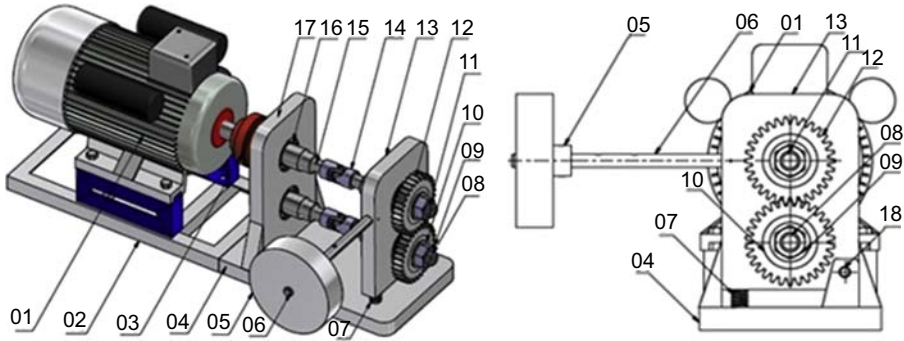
Schematic view of the experimental bench. (1) Motor, (2) motor stand, (3) coupling, (4) base, (5) weight, (6) lever, (7) spring, (8) driven shaft, (9) driven shaft, (10) washer, (11) driver shaft, (12) test gears, (13) front bearing support, (14) universal coupling, (15) driver shaft, (16) bearing, (17) back bearing support, (18) pivot.
